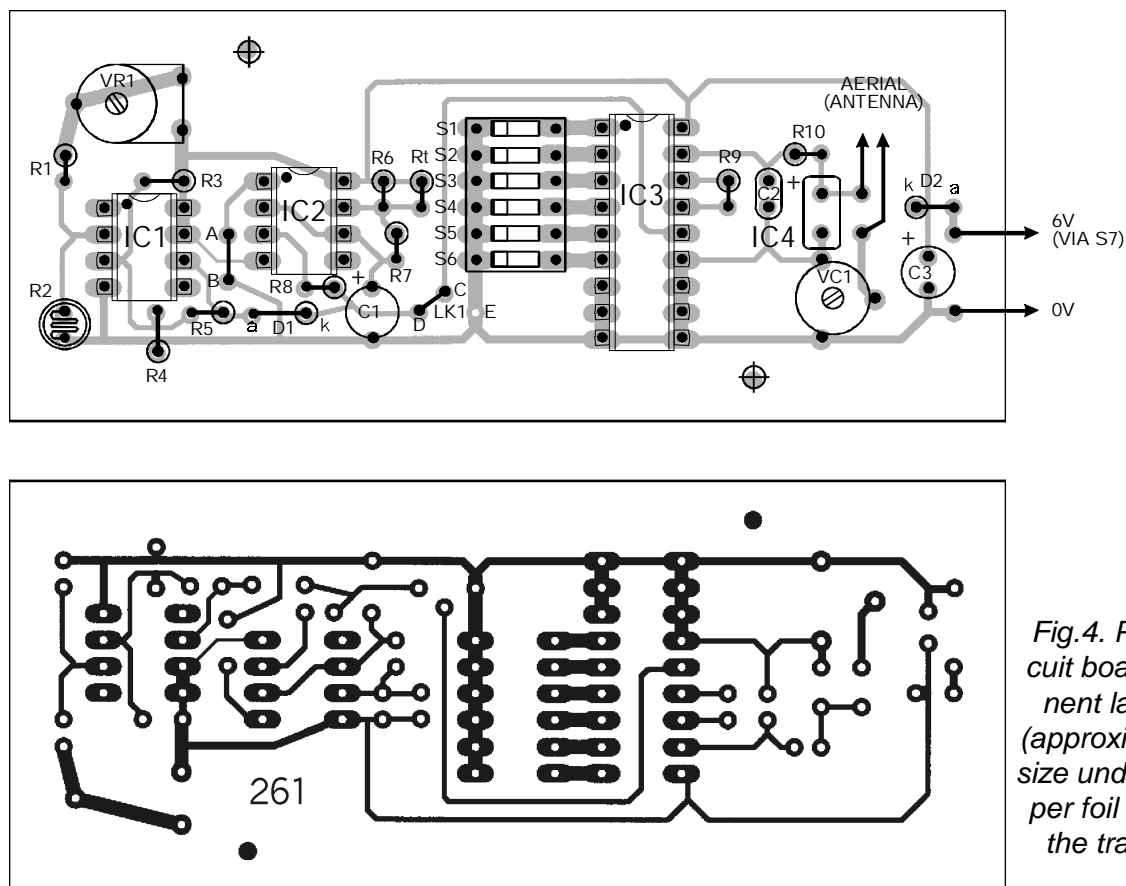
Printed circuit board component layout and (approximately) full size underside copper foil master for the transmitter.
